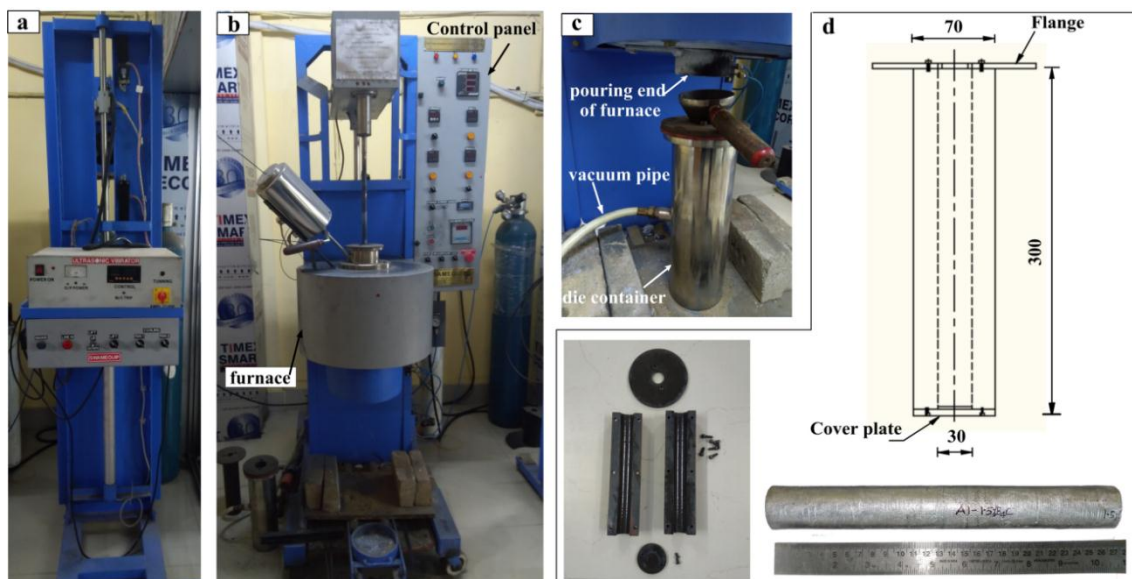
(a) Ultrasonic vibrator, (b) stir casting unit, (c) melt pouring arrangement, (d) die drawing, disassembled die and fabricated cast specimen
